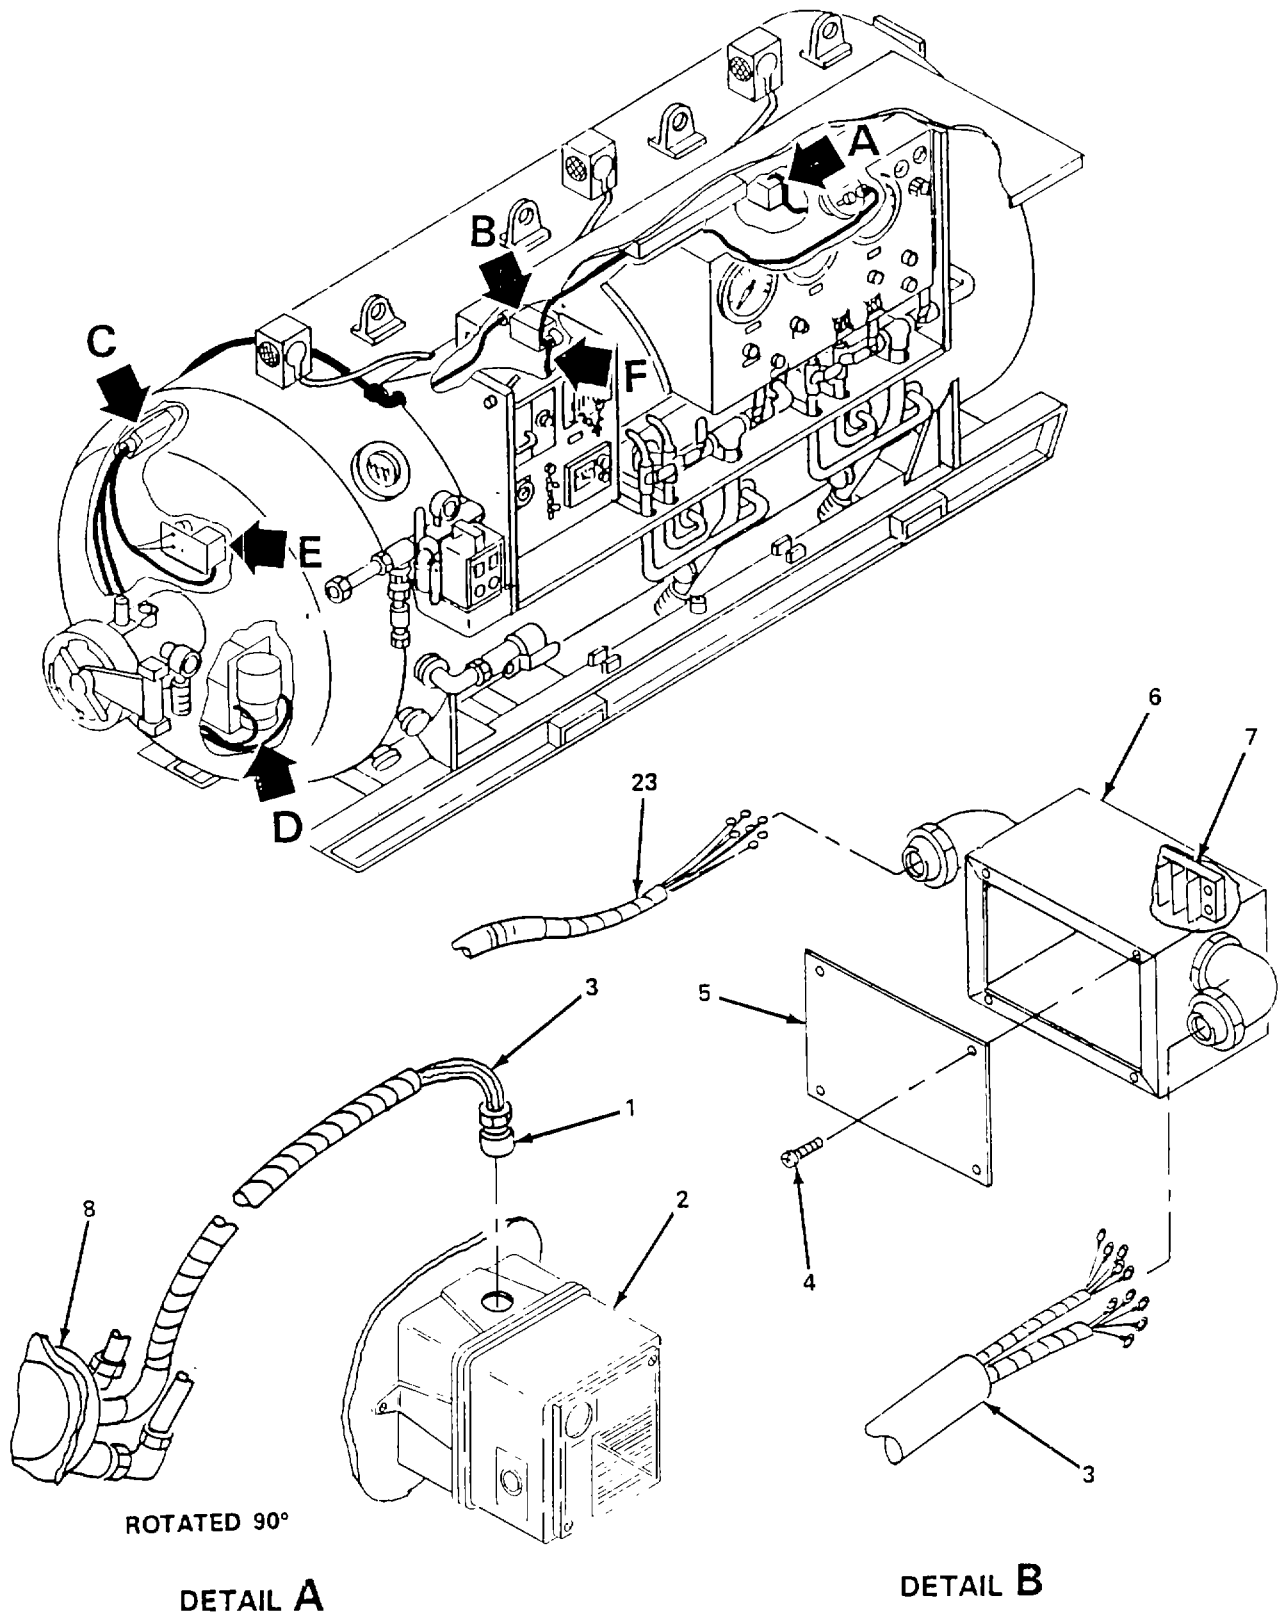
Wiring Harness, Replace (Sheet 1 of 3).
